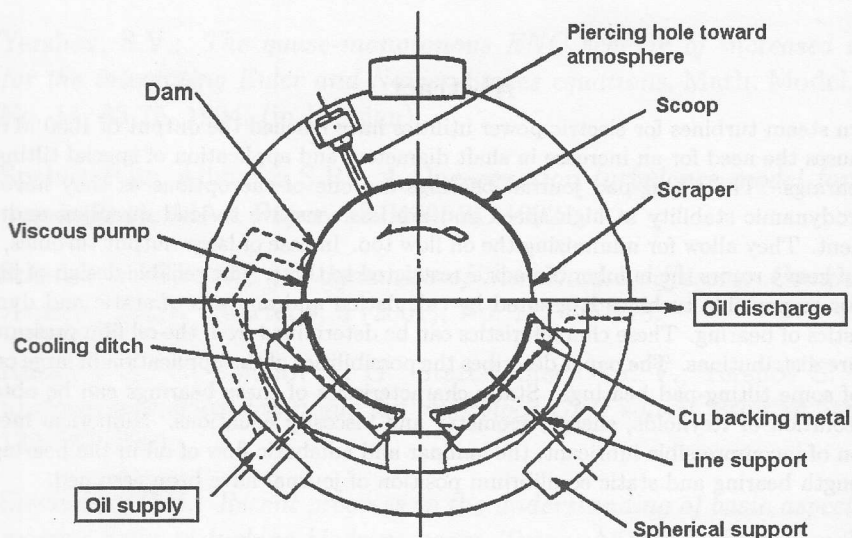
Hybrid journal bearing with upper fixed pad (lobe) and tilting 2-pads in the bottom part of bearing [1] applied in the bearing system of turbogenerator.
